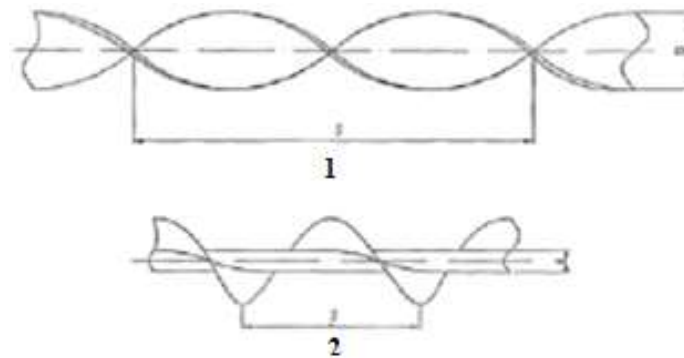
Screw inserts: 1-twisted tape; 2-screw
